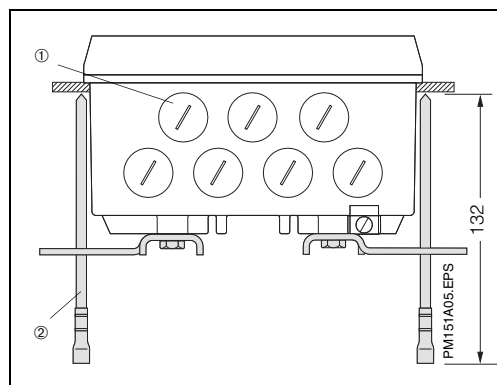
Bottom of field housing with mounting dimensions and tensioning screws for panel mounting installed
